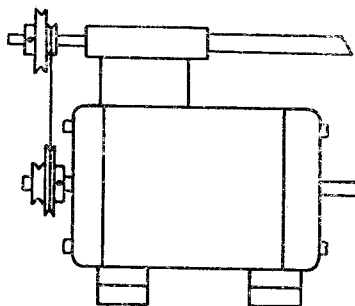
Multi-speed pulley drive arrangement with reversed shaft.
